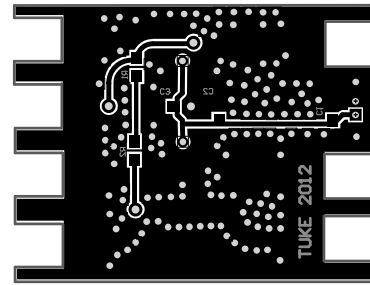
The designed PCB for I-Q modulator - the bottom layer
